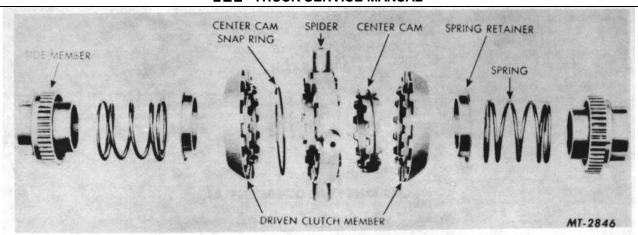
Internal Spring Design Differential Locking Unit (Exploded View)
